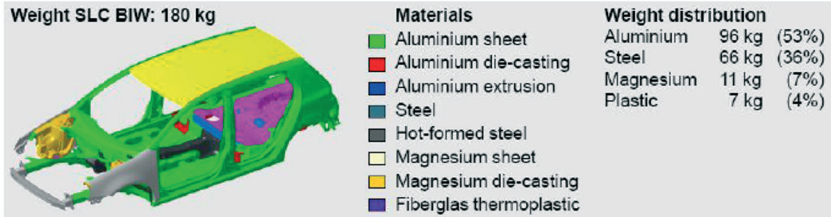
Materials used for SuperLIGHT-Car design [30]
